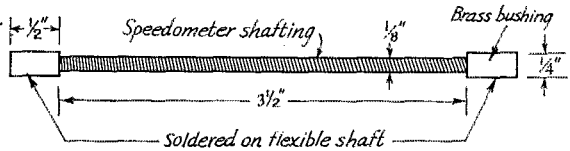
HOME-BUILT FLEXIBLE SHAFT COUPLING
